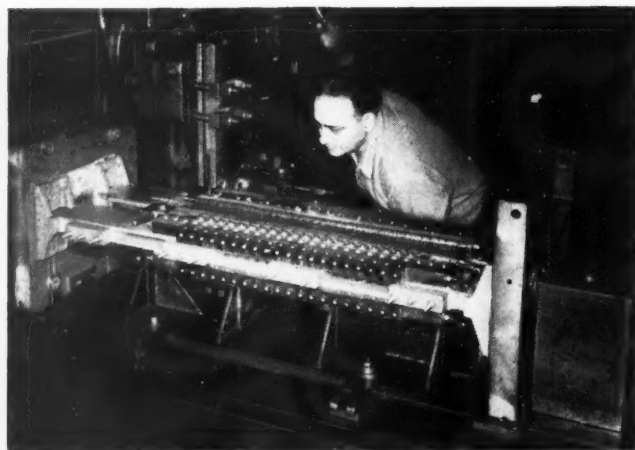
View Showing Rockford Hy-Draulic Shaper-Planer Machining a Copper Core of a Resistance Welder
